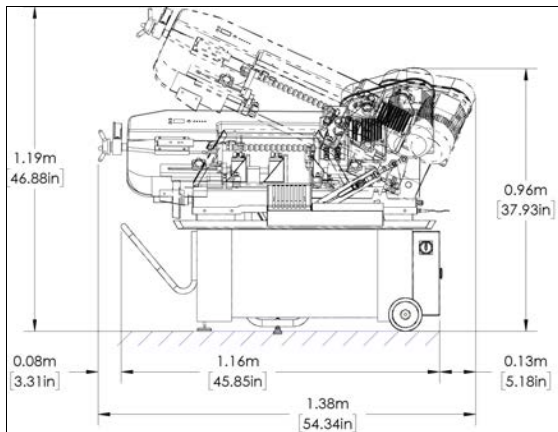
Dimensions of the machine itself, as viewed from the front.
